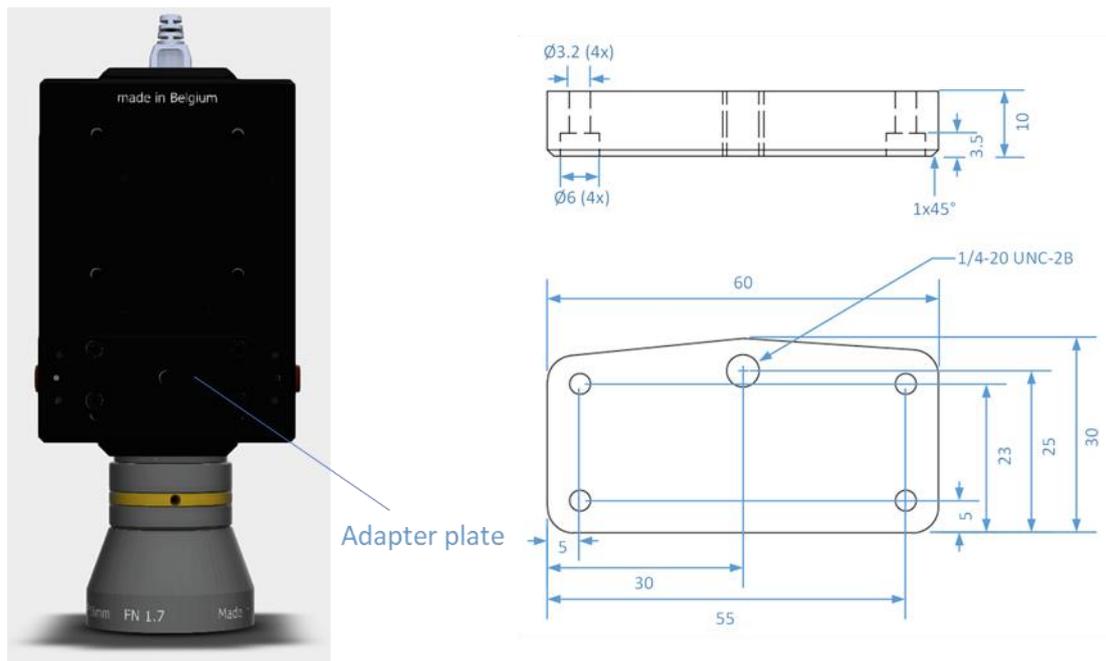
Top and side views of the tripod adapter plate along with its dimensions (all dimensions are in millimeter)
